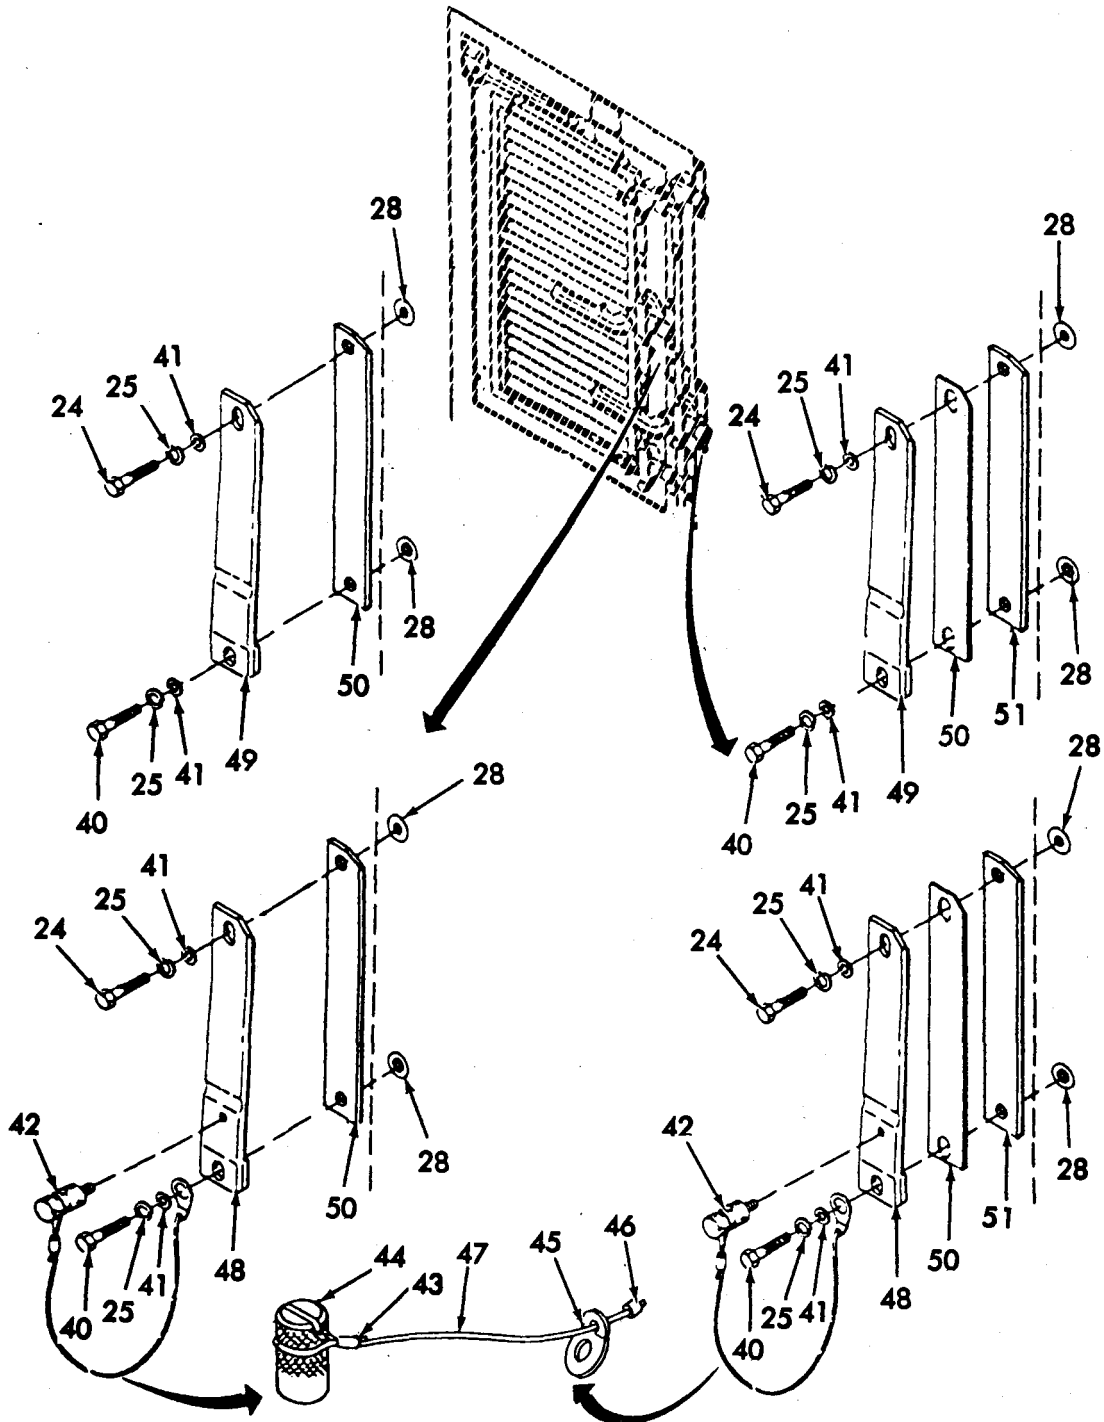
Shelter, Electrical Equipment S-250/G (Sheet 3 of 4)
